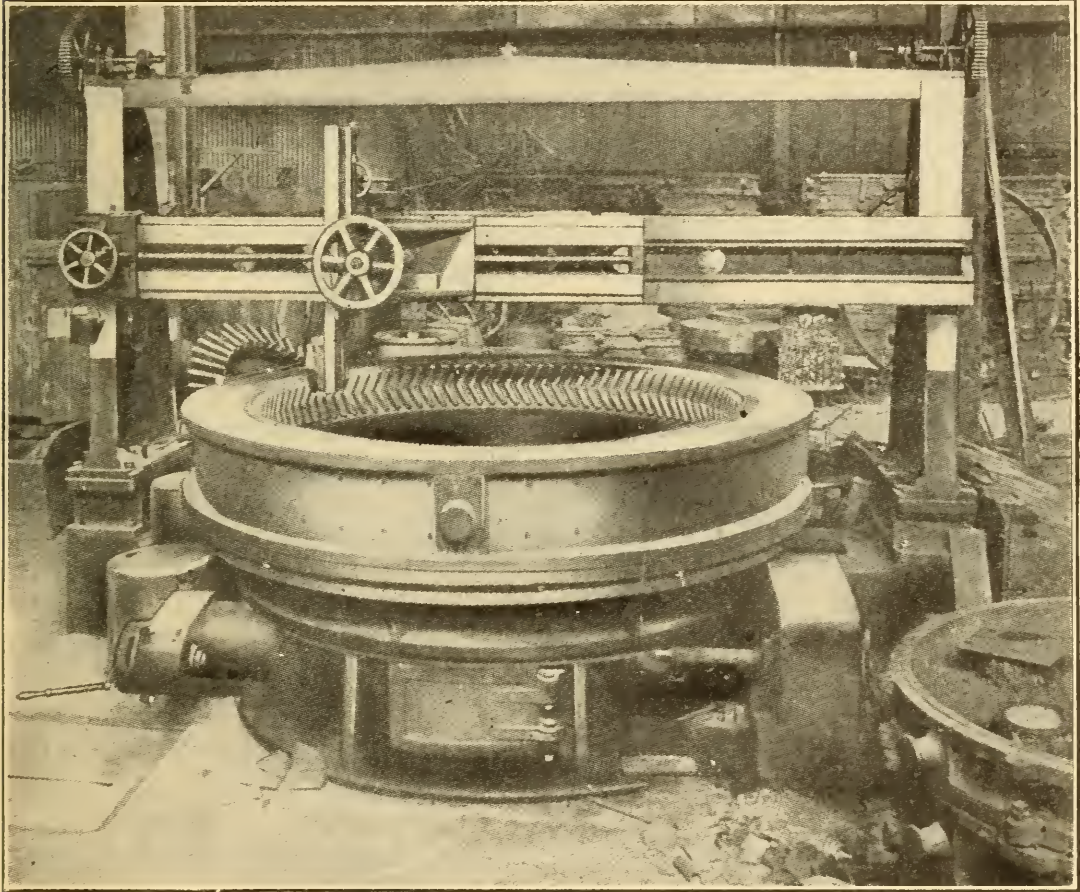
THE LARGEST GEAR-MOLDING MACHINE.
